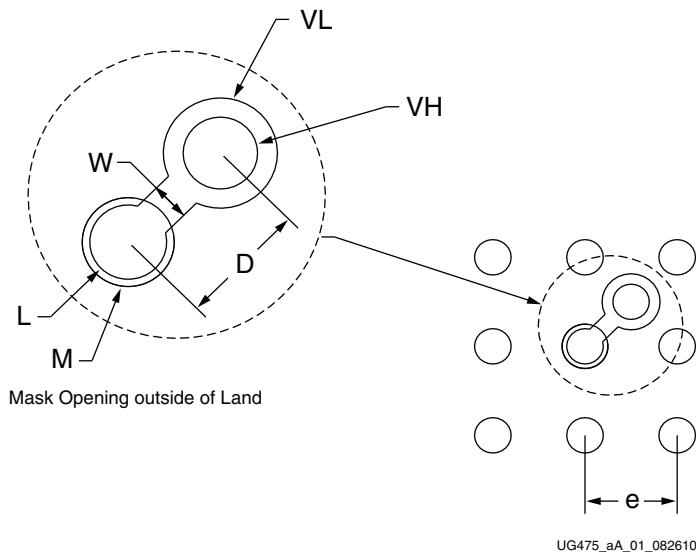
Suggested Board Layout of Soldered Pads for BGA Packages
